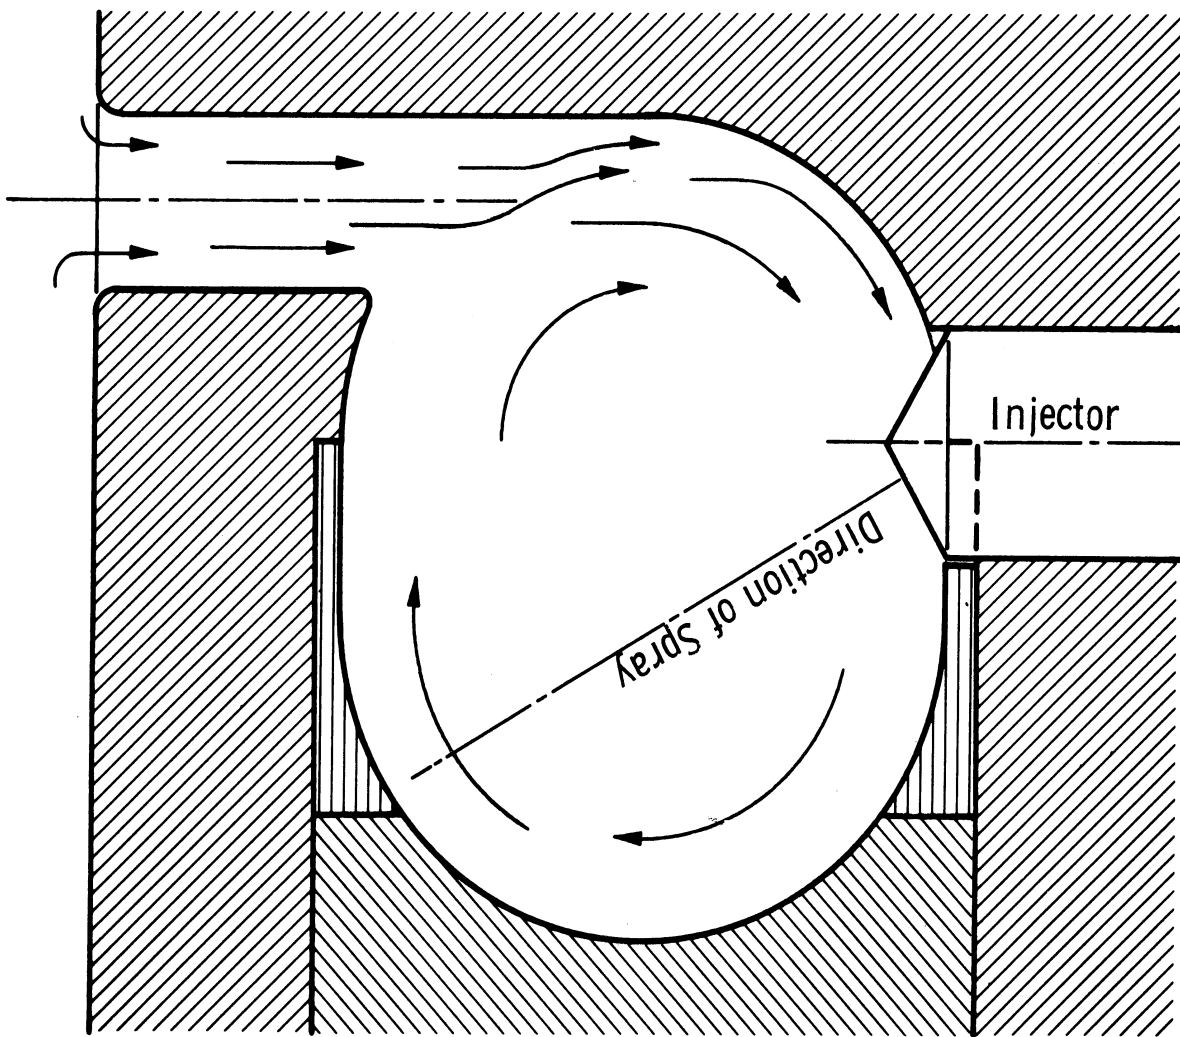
Turbulence in modified combustion chamber of Lister engine.
